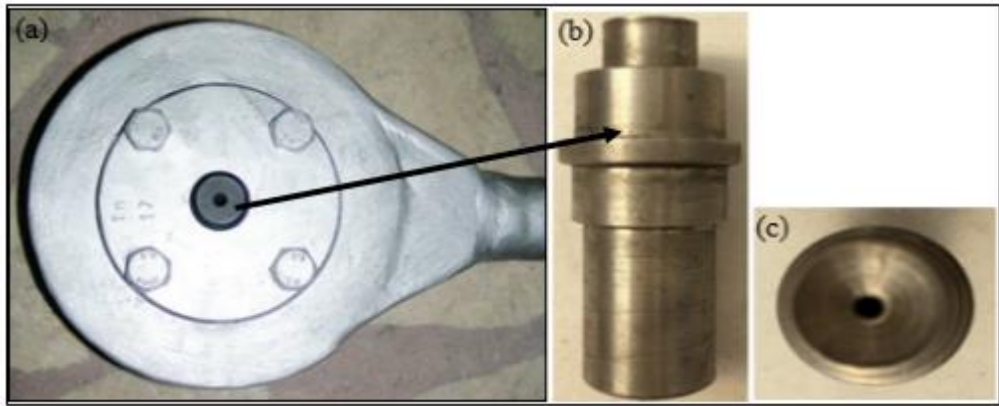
(a) Nozzle holder and Nozzle, (b) Front view, (c) Top view.
